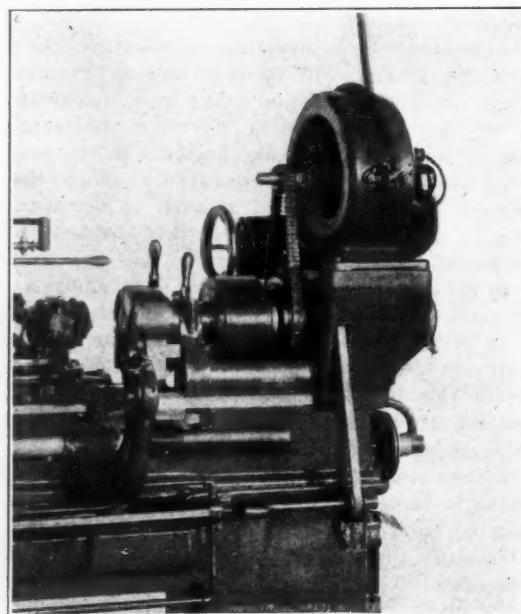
Jones & Lamson Lathe Driven by Crocker-Wheeler Motor.
